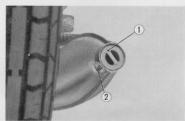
Removing diffuser pipe 1 Diffuser pipe (2) 6×8 hex bolt
